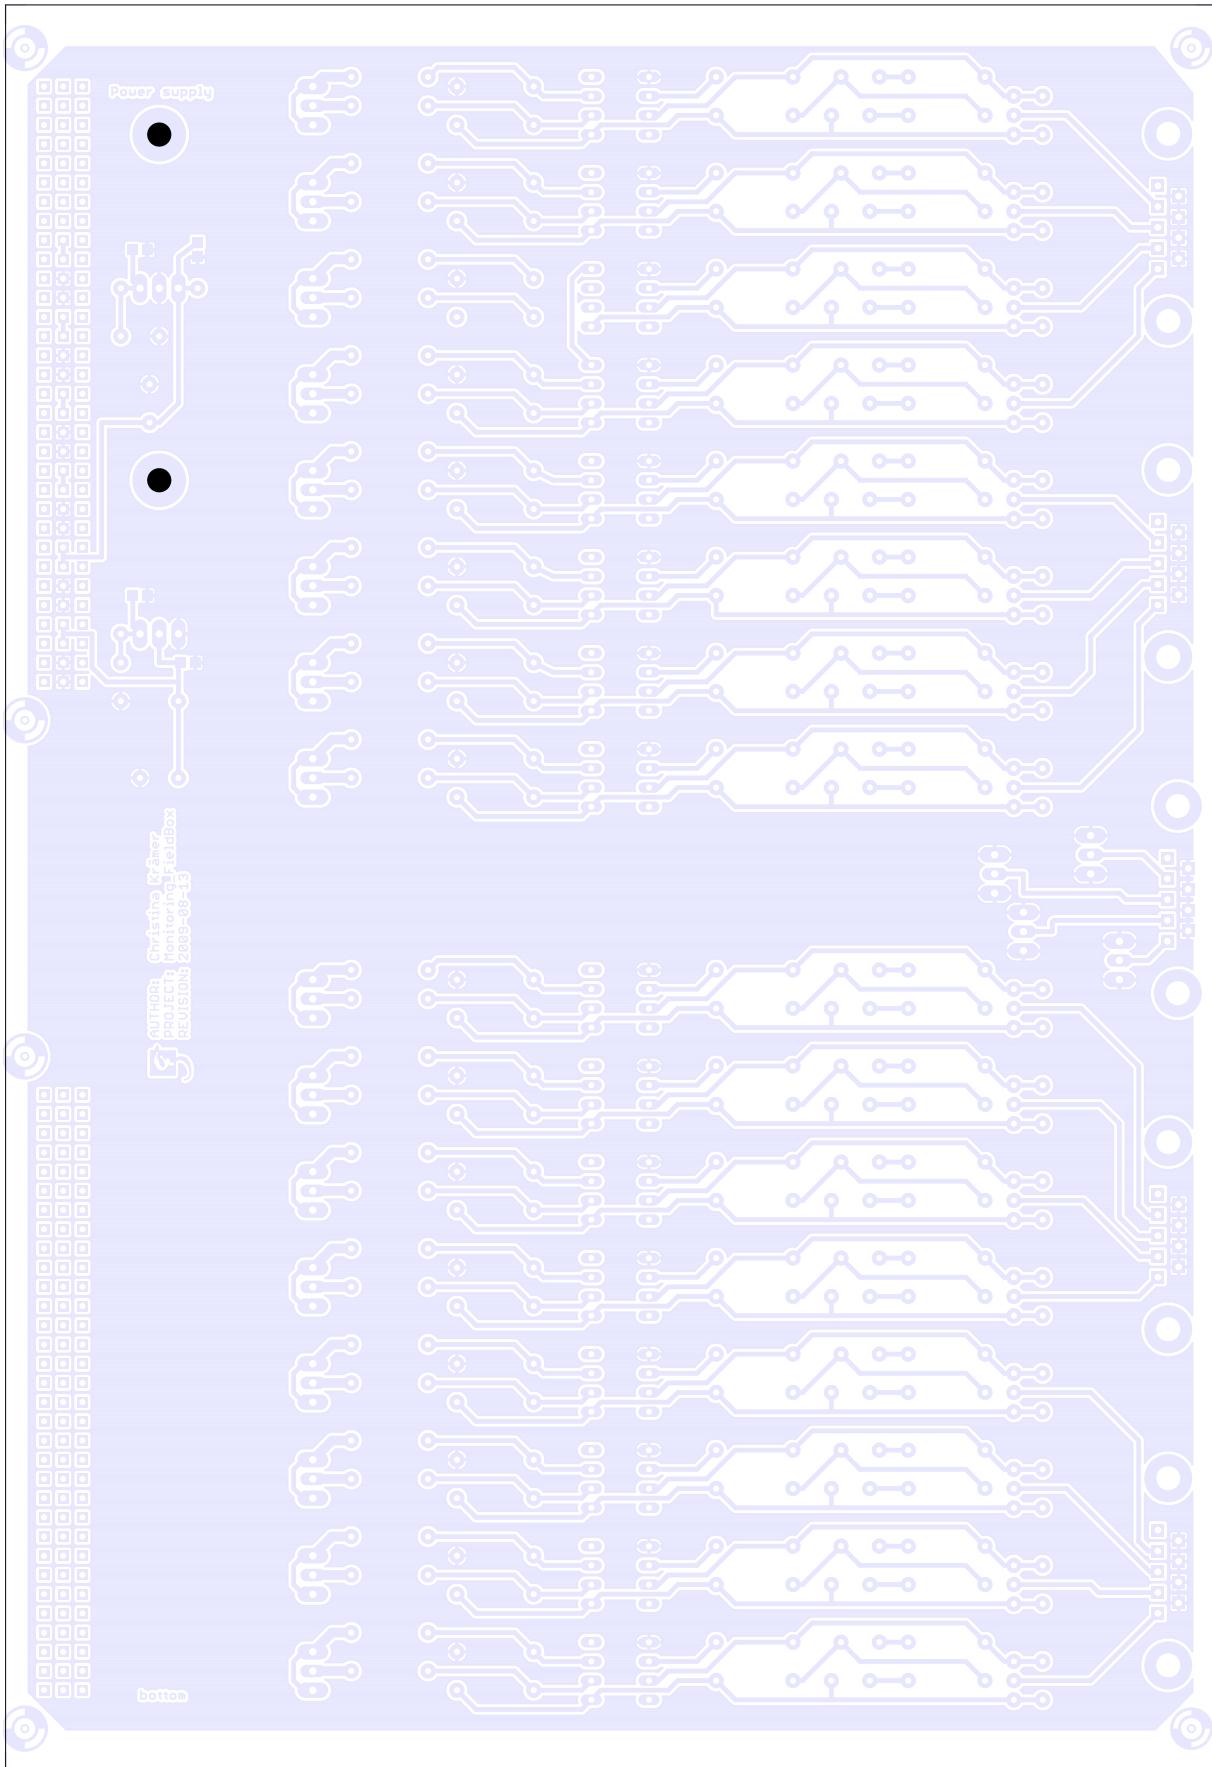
Board bottom view showing drills with 3.2 mm (0.126 in) diameter
